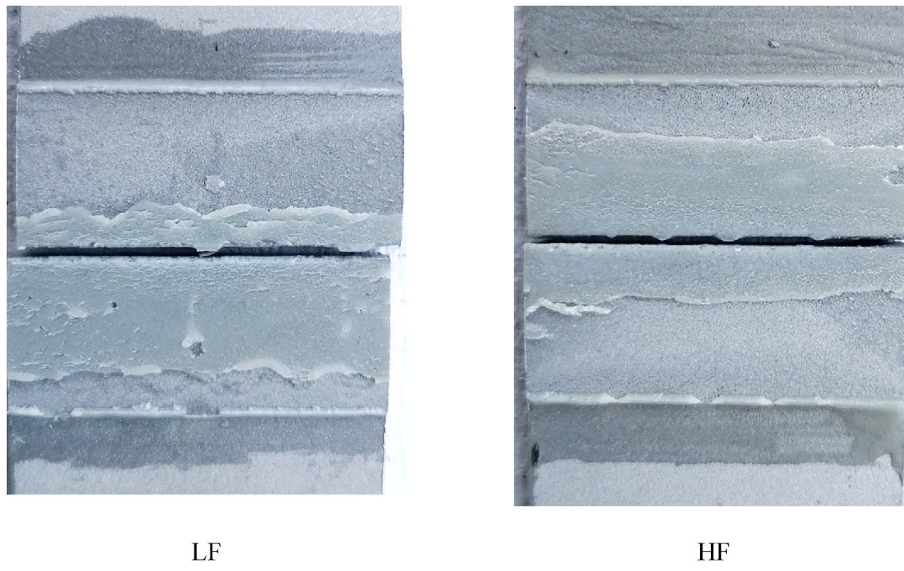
Example of fracture surfaces for AL joints, load ratio  $R = 0.4$ .
